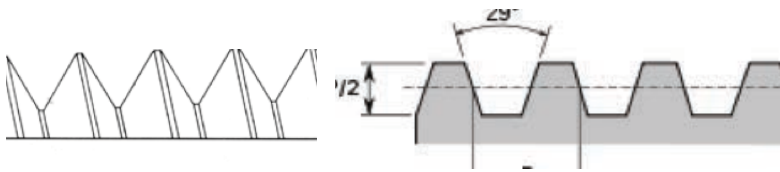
The left thread drawing are national pipe thread, the right drawing is an acme thread
